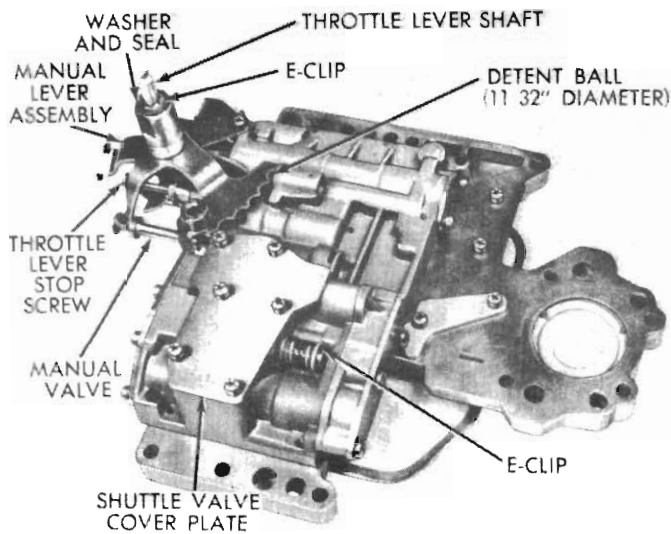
Valve body controls (A-727 and A-904-LA)
